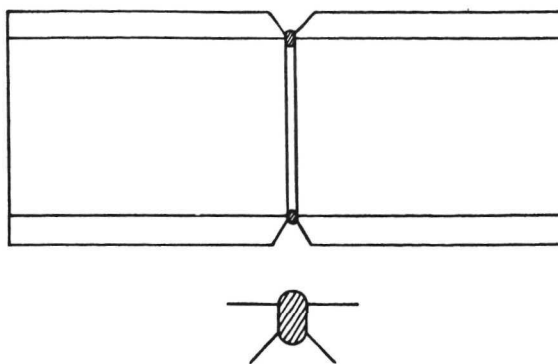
Consumable insert for welding nickel pipe.
